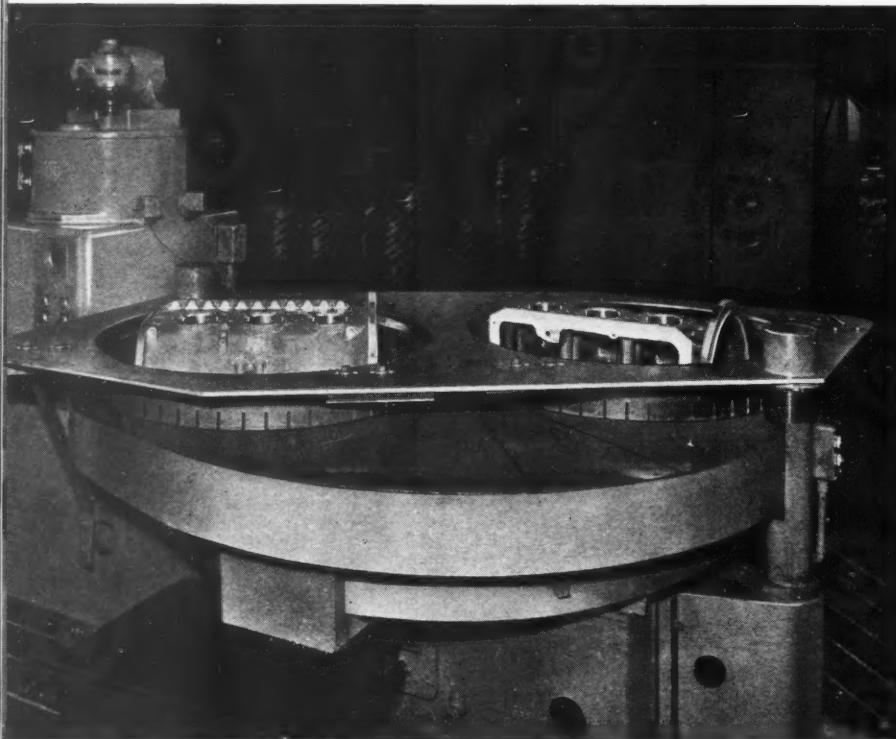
An 84-inch machine is employed to lap the mating faces of cast-aluminum, aircraft type engine crankcases.
